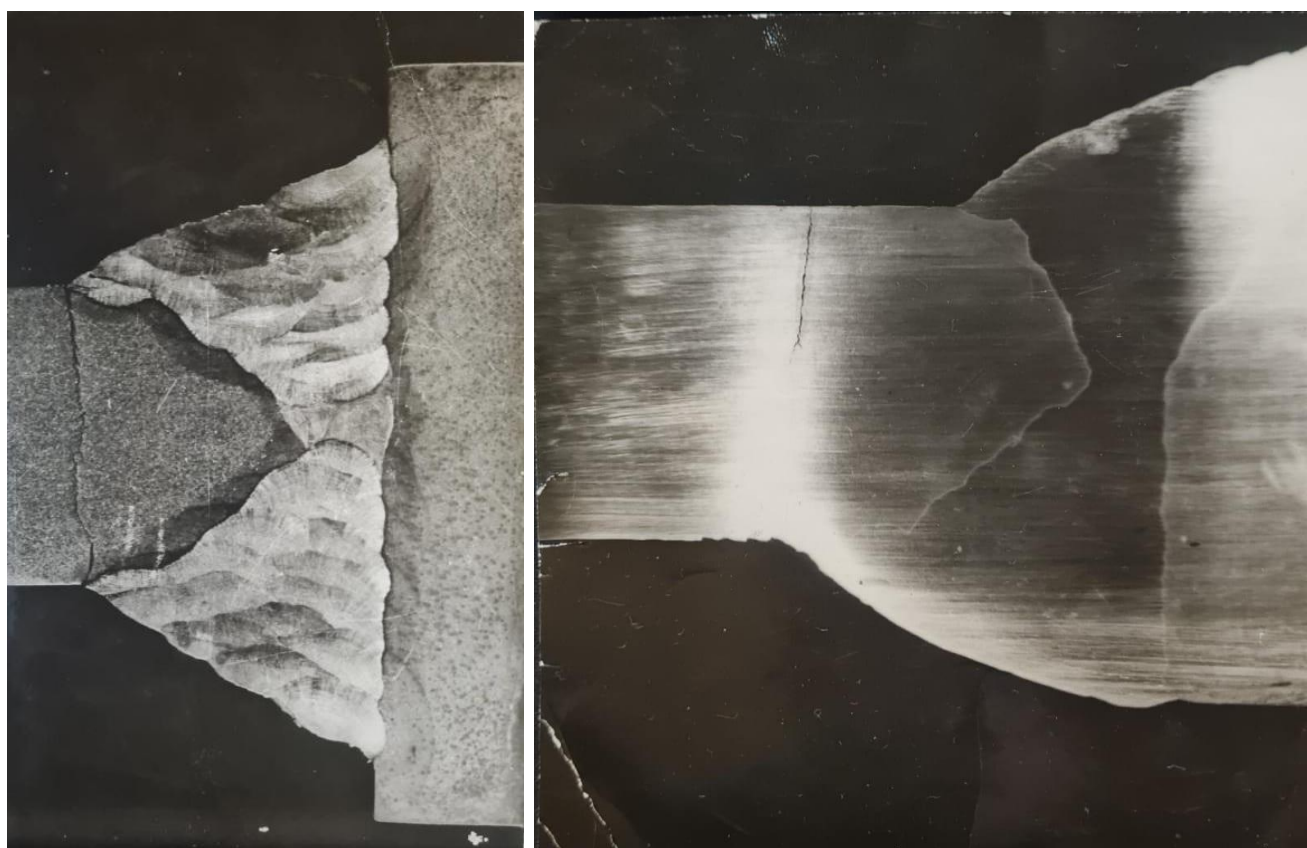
Section of the welded joint of “fitting – plate” type: 1 — fitting; 2 — plate (shell)
